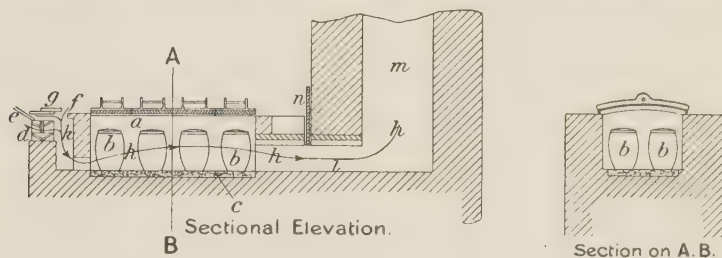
Improved Type of Nobel Liquid Fuel Crucible Furnace.
